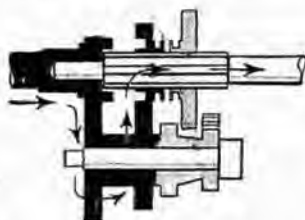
How power is transmitted in second gear. The layshaft has been brought into operation by sliding the pinion on the main shaft.
